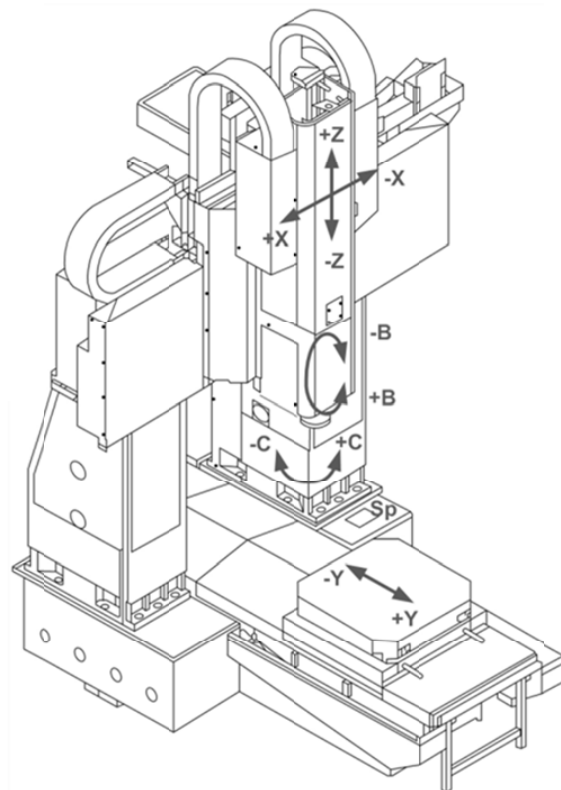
Kinematic of five-axis planing and milling machine tool.
